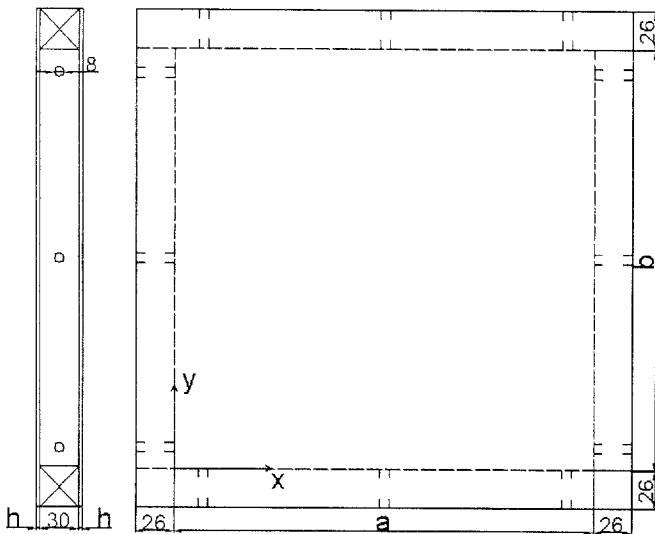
Specimen geometry and assembly setup for test (units are millimeters)
